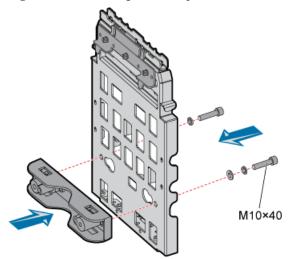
Securing the multi-purpose attachment plate on the mounting plate
